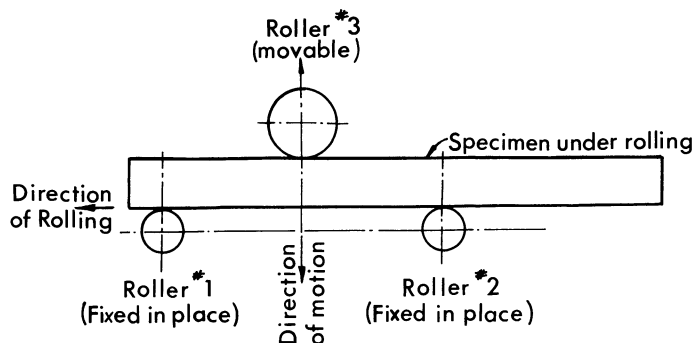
Set-up of test specimen in a pyramid-type rolling machine (top view)
